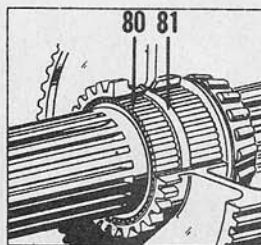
Models TO20, and TO30 main shaft first gear and countershaft third gear needle bearings installation. Similar gears in model TE20 rotate on bronze bushings.
